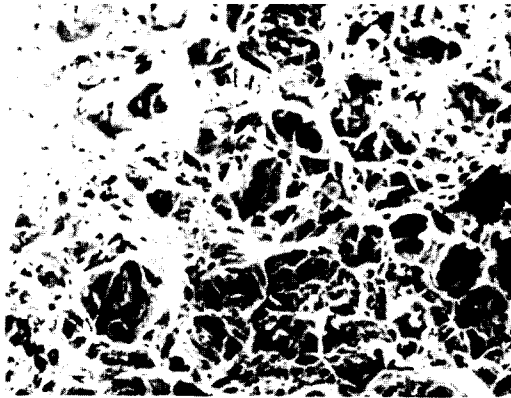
Fracture surface of SNCM220 friction welding joints in optimum zone by SEM (×1000)
